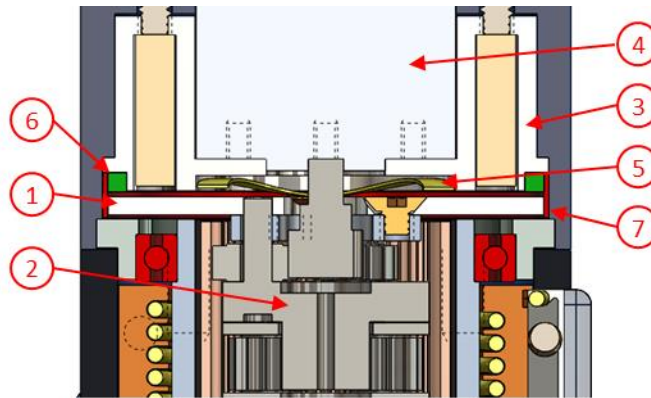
Solid model cross section of the carrier clutch. A ferromagnetic disk clutch armature (1) is collinearly fixed to the first-stage carrier (2) of the planetary gear transmission. A custom solenoid clutch stator (3) is collinearly fixed to the drive motor (4). A wave disk spring (5) separates the armature and stator when the clutch is de-energized. A medium durometer square-cross section O-ring (6) is fixed to the stator and becomes compressed by the armature when the clutch is energized. A plain bearing (7) encircles the armature and O-ring. When the clutch is de-energized, rotation and translation of the armature are constrained by the wave spring and plain bearing, respectively.
